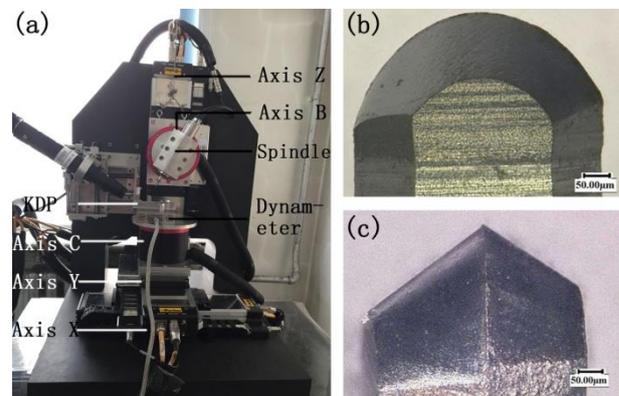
The ultra-precision machine tool system: a) main components, b) and c) side views of micro PCD ball-end mill.
